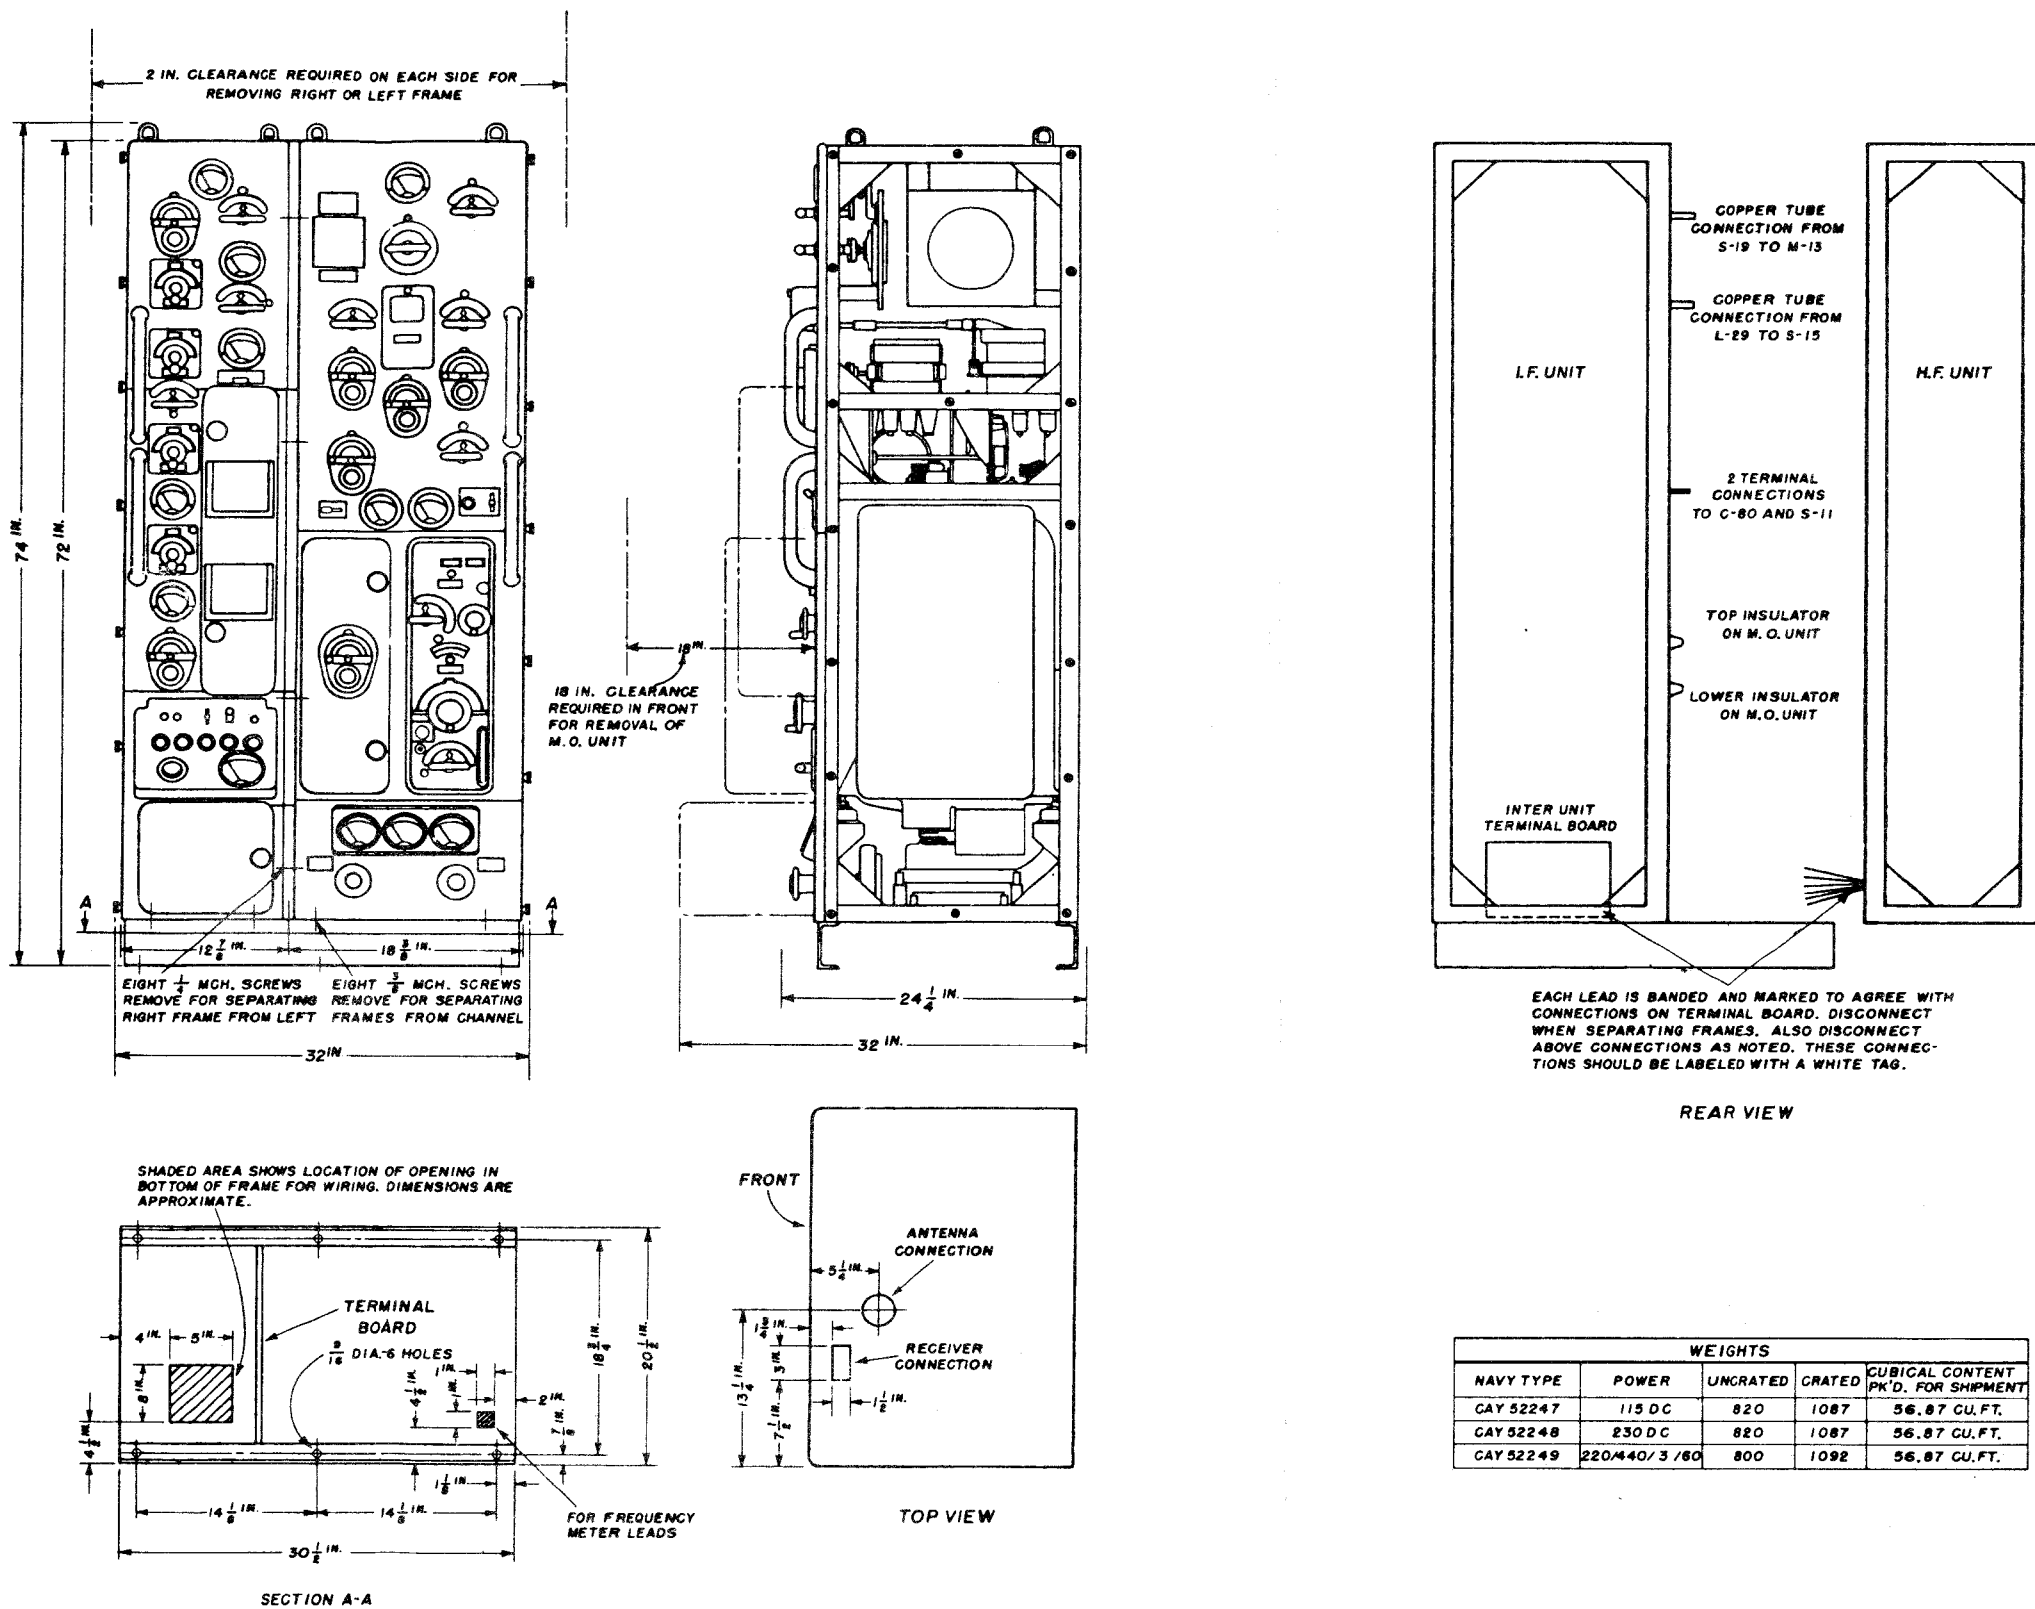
Transmitter Unit, TBL-Series. Outline Drawing (Dwg. 7610943)
